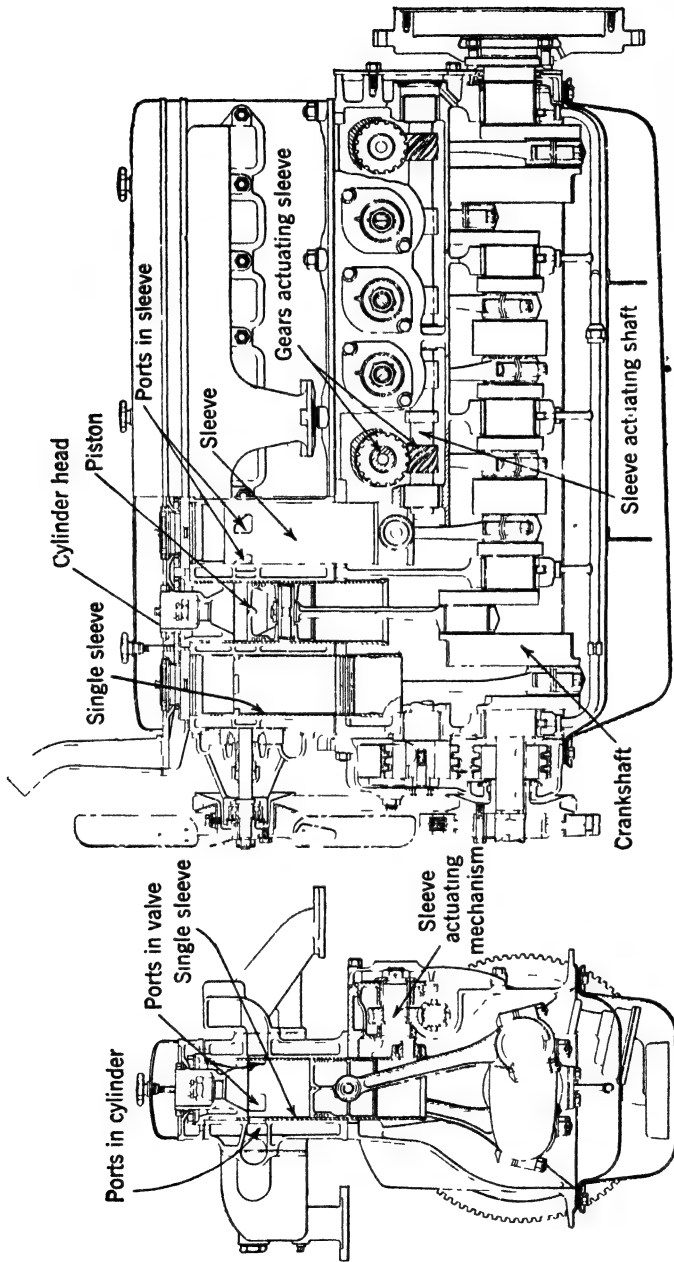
A.—Sectional View of Automobile Type Single Sleeve Valve Motor.
